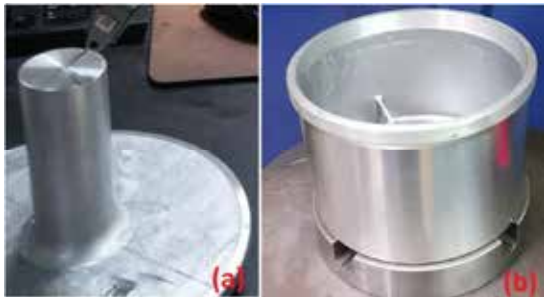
The bottom plate (a) and the body (b) for Aluminum piston
